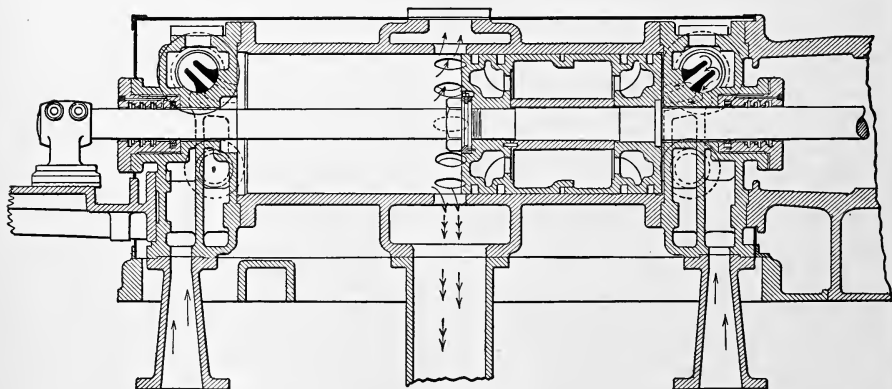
Section through Cylinder of a C. & G. Cooper Co.'s Uniflow Engine.
